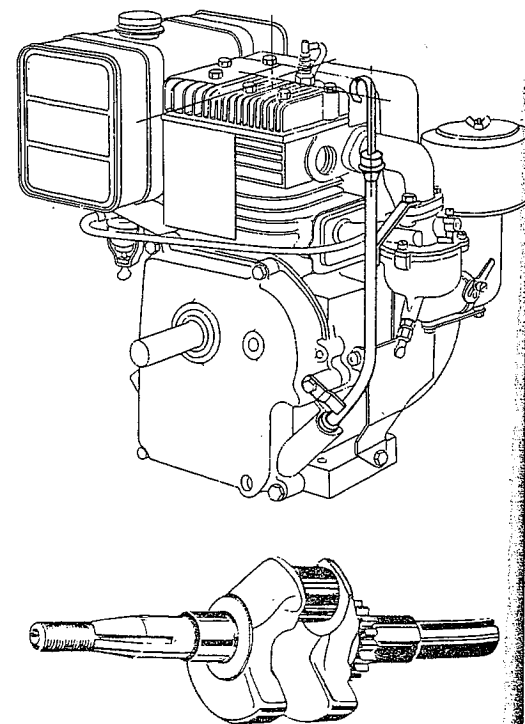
An engine with a horizontal crankshaft (Briggs & Stratton Corp.)
